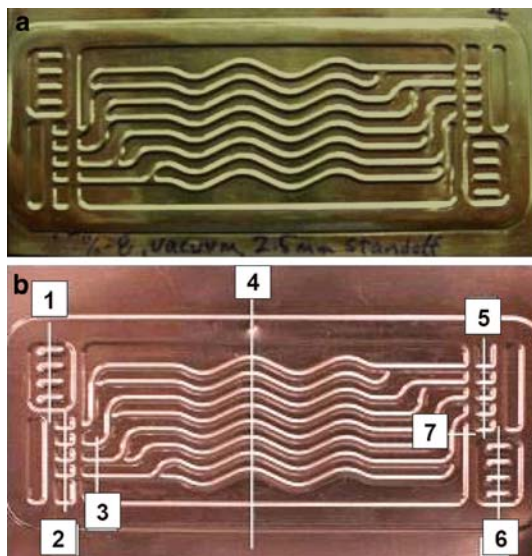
(a) A 316L stainless steel sample formed electromagnetically using the uniform pressure actuator at 7.2 kJ. (b) A stainless steel sample formed by conventional metal stamping. The numbers (1-7) show profile tracked during laser scan measurements in Fig. 5(a-d)
